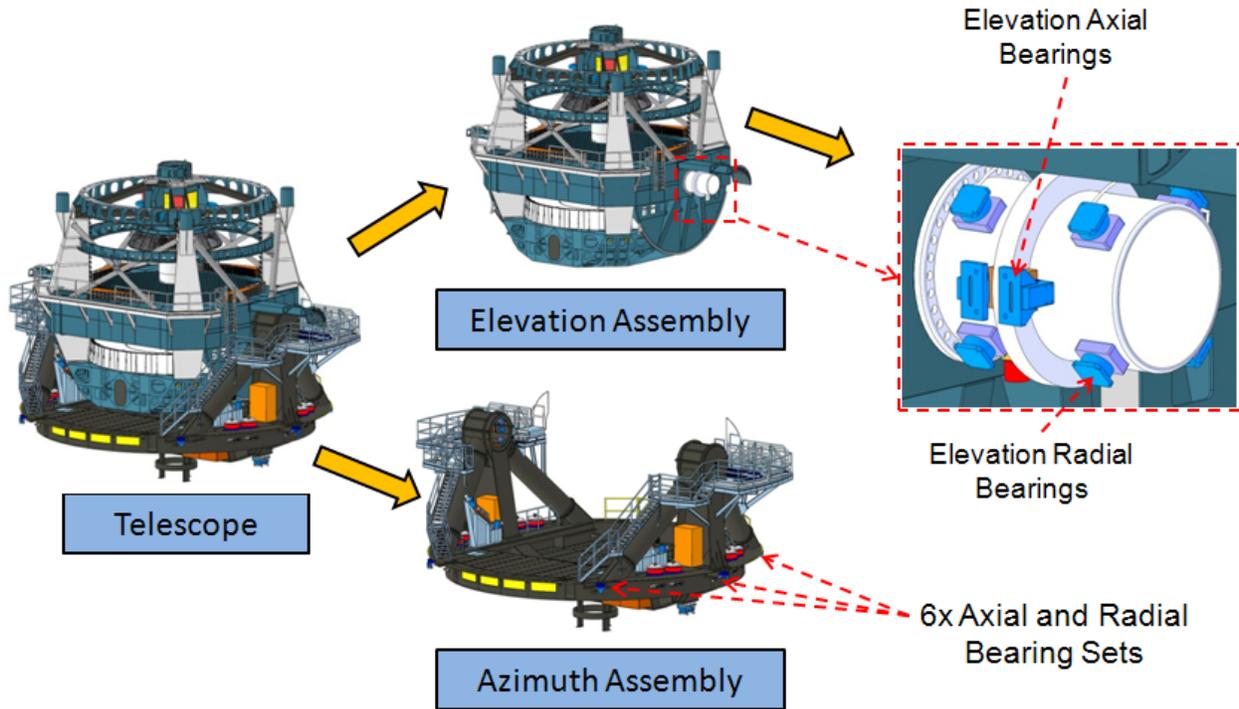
Hydrostatic bearing configuration and locations on the TMA
